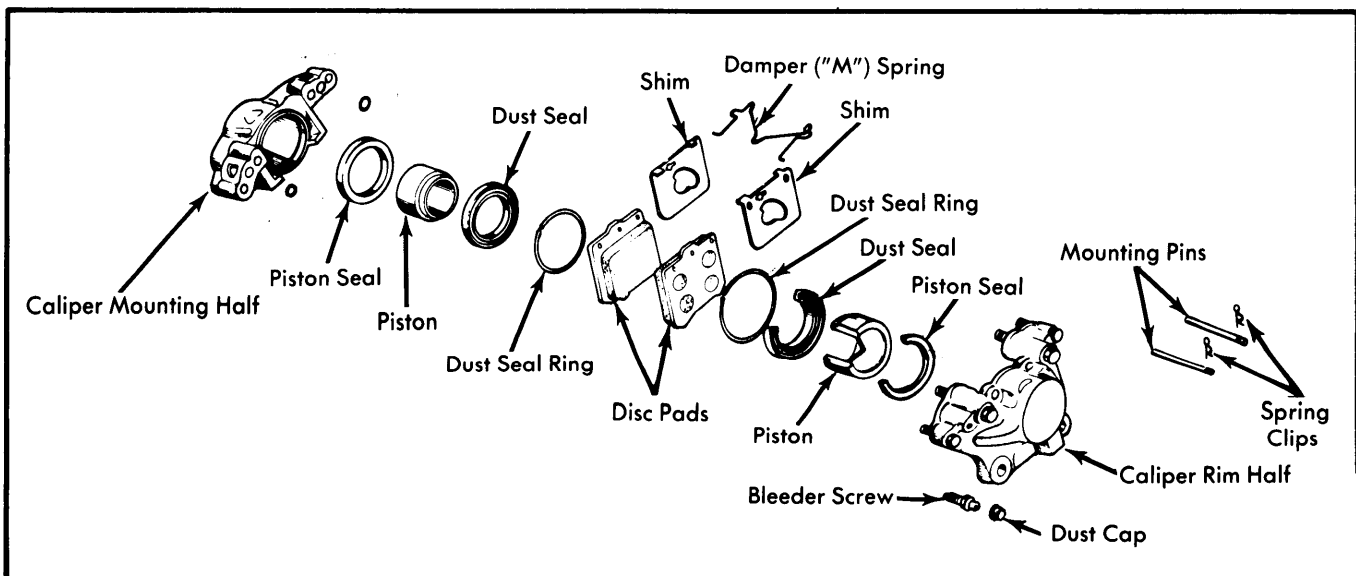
Exploded View of Opel Front Disc Brake Assembly
